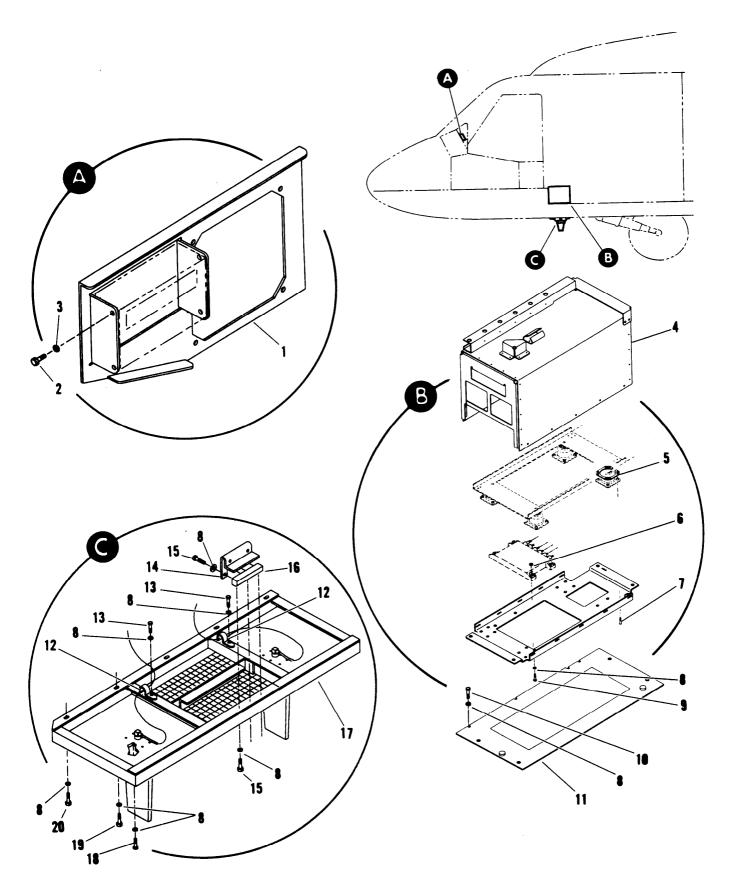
UH60A/L System Installation Cable Group (Sheet 1 of 3)
